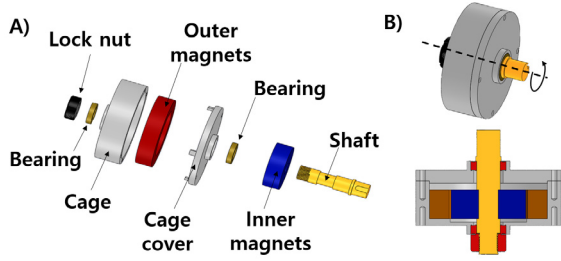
Schematic of a magnetic spring joint. A) Exploded view. B) Axial cross-section view.
